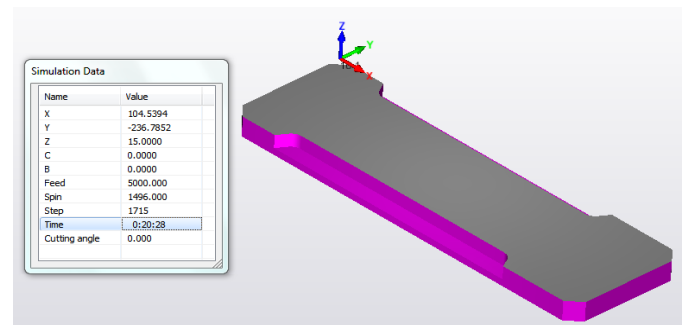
Machining time for endmill $\phi 16$ mm per one work piece
